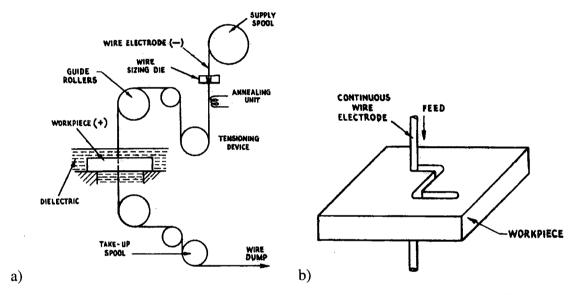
(a) Depicts the general set-up of EDM wire machining, while (b) shows a close-up of machining taking place
